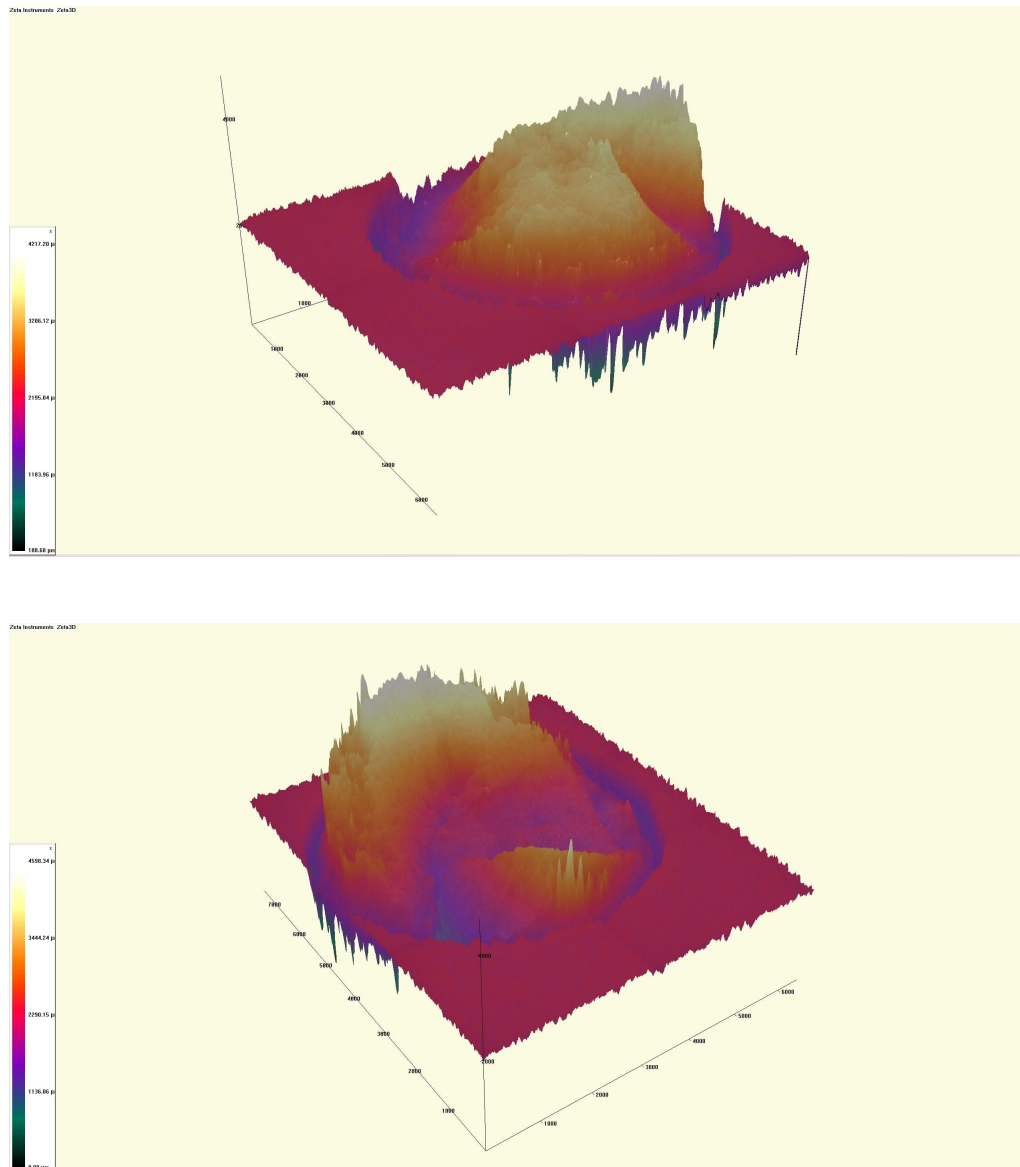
3D Fracture Surface representation of a 95% porosity, 100°C specimen.
